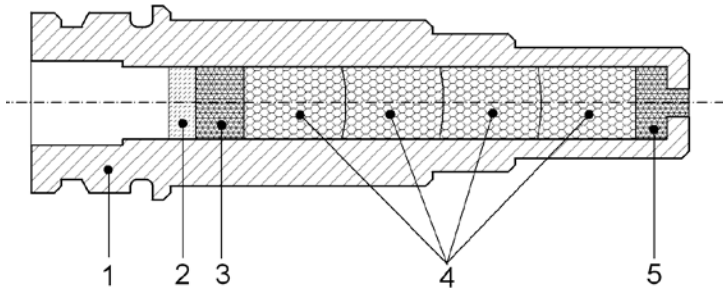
Axial, longitudinal cross section of design of tested multi-segment delay element before its firing.
